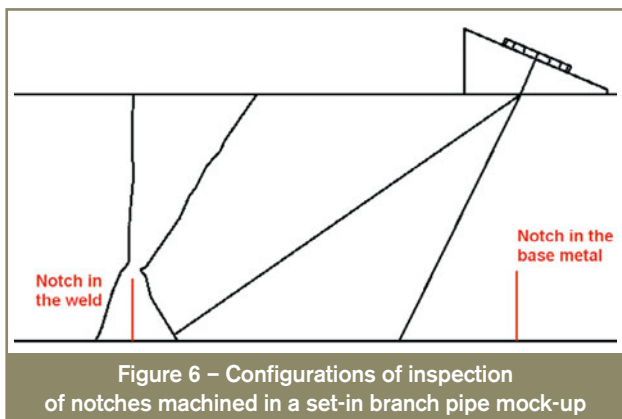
Configurations of inspection of notches machined in a set-in branch pipe mock-up
